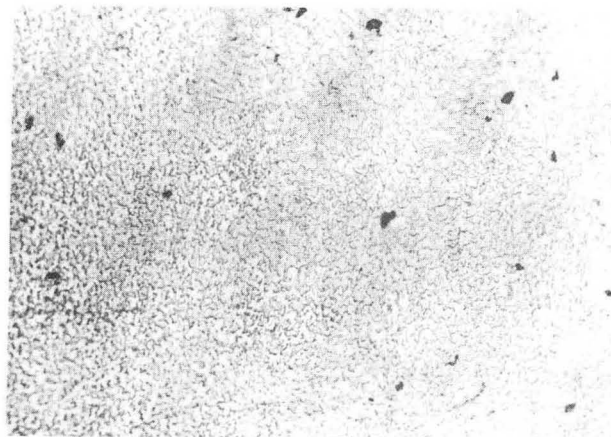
Fracture surface of polycarbonate SEN specimen exhibiting flat fracture. Test conditions: room temperature (300°K) and 0.2 cm/min.
